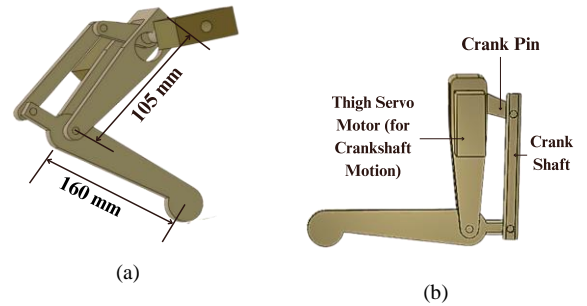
3D model of the leg (a) thigh and calf dimensions (b) motor placement
